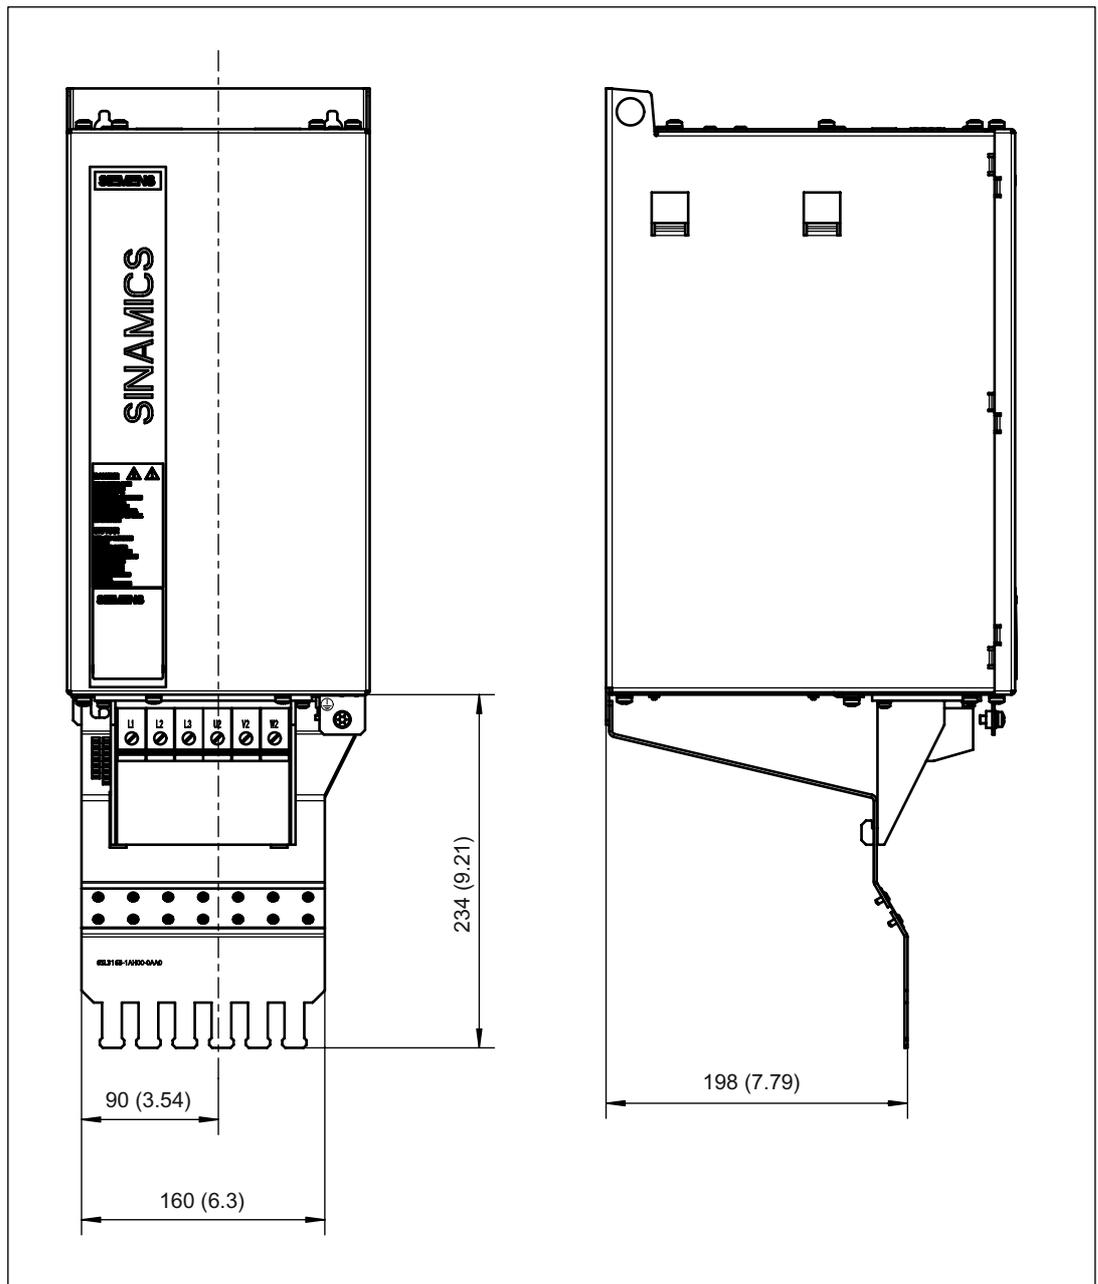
Dimension drawing of shield connecting plate on the 55 kW Active Interface Module, all dimensions in mm and (inches)
